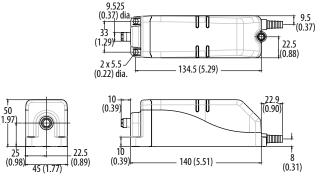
Actuator and Actuator Mounting Bracket (440G-LZAM1) [mm (in.)]
